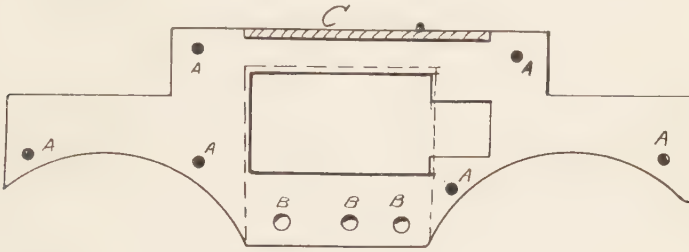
SKETCH OF AUXILIARY FRAMES FOR THE CYLINDERS.
